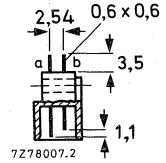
Straight dip-solder pins, with protruding earth contacts.
